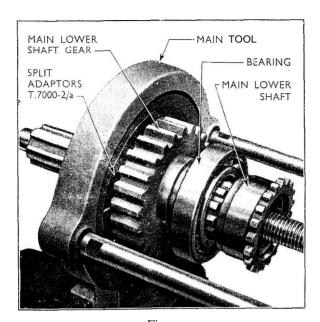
Replacing Bearing and Gear on Main Lower Shaft
